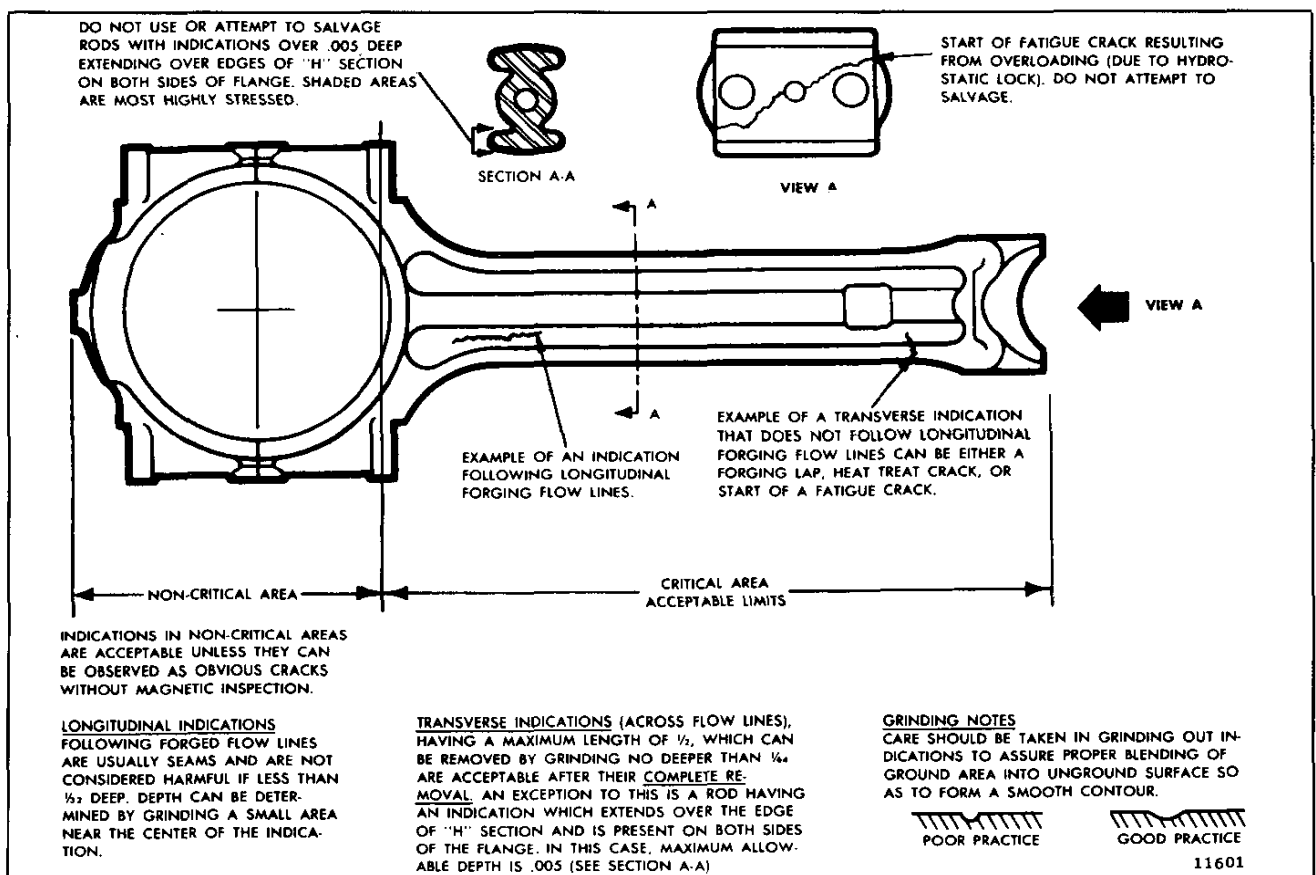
Magnetic Particle Inspection Limits for Connecting Rod
